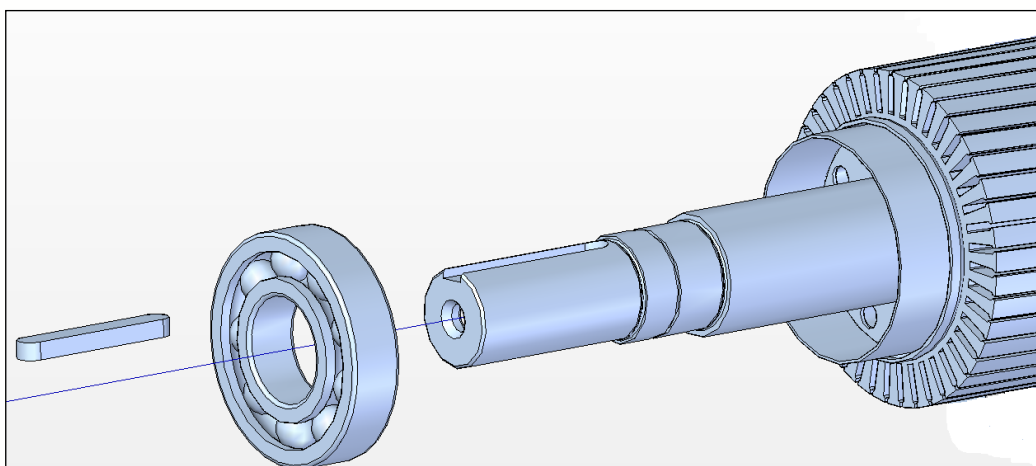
Replacing bearings on ID motors (steps 6 and 7)
